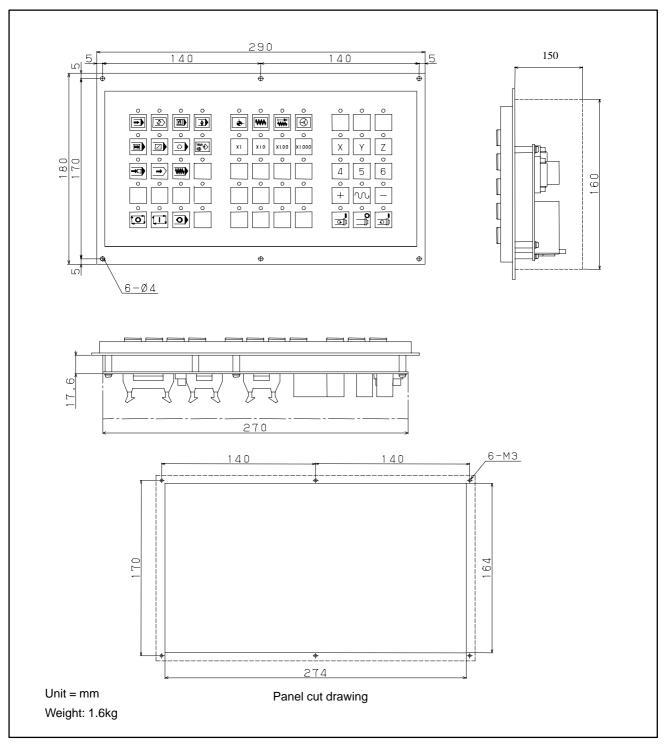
Machine operator's panel (Main panel B) Specification No. : A02B–0236–C231
